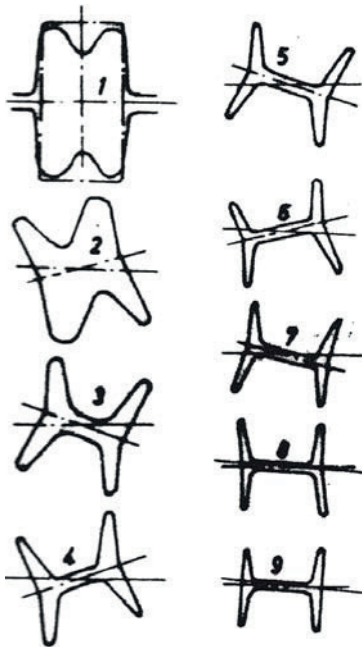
Typical 9-passes roll pass design for rolling INP or W (wide flange) I-beams with taper flanges [1]
